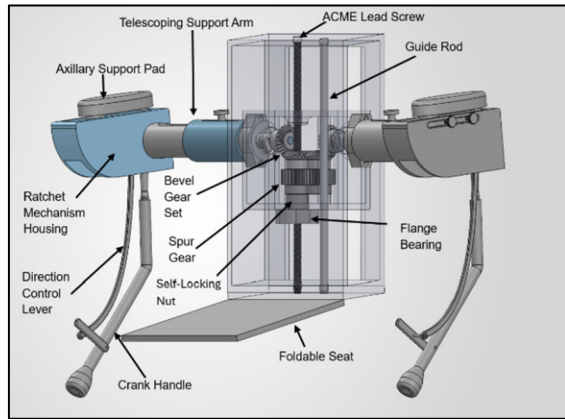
CAD Model showcasing the main functional sections of Team A’s model. The center housing the miter gears and spur gears to be driven up the ACME lead screw. The parts extending from the center box are the telescoping support arms and ratchet mechanism housing. The housing contains the ratchet mechanism allowing the switching of rotational direction of the gears. The rods protruding from the ratchet housing are the cranks to drive the rotation of the gears.
